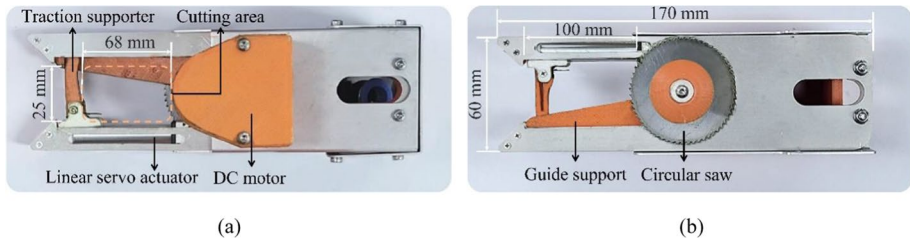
The proposed cutting module: a top view and b bottom view
